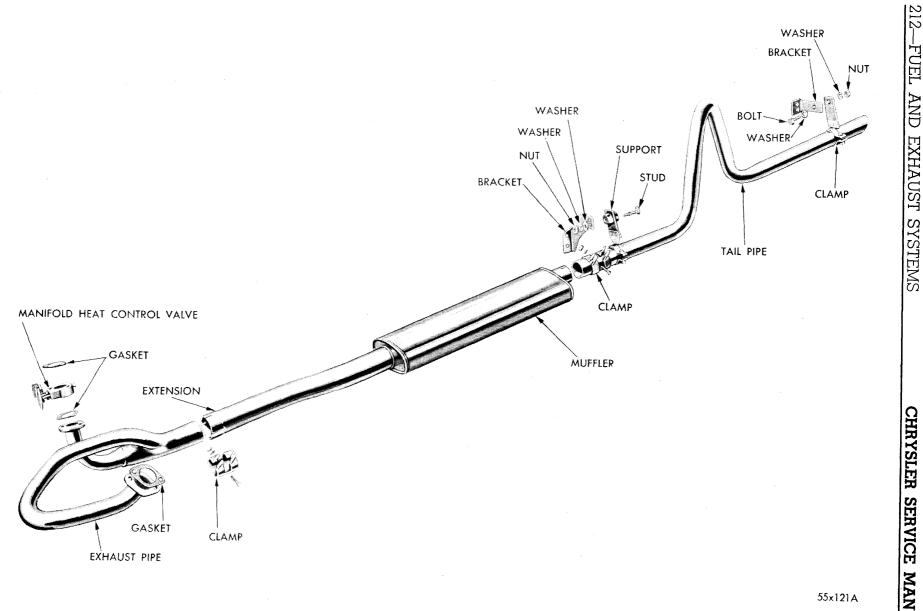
Exhaust System (Single Rocker Shaft Engine)
